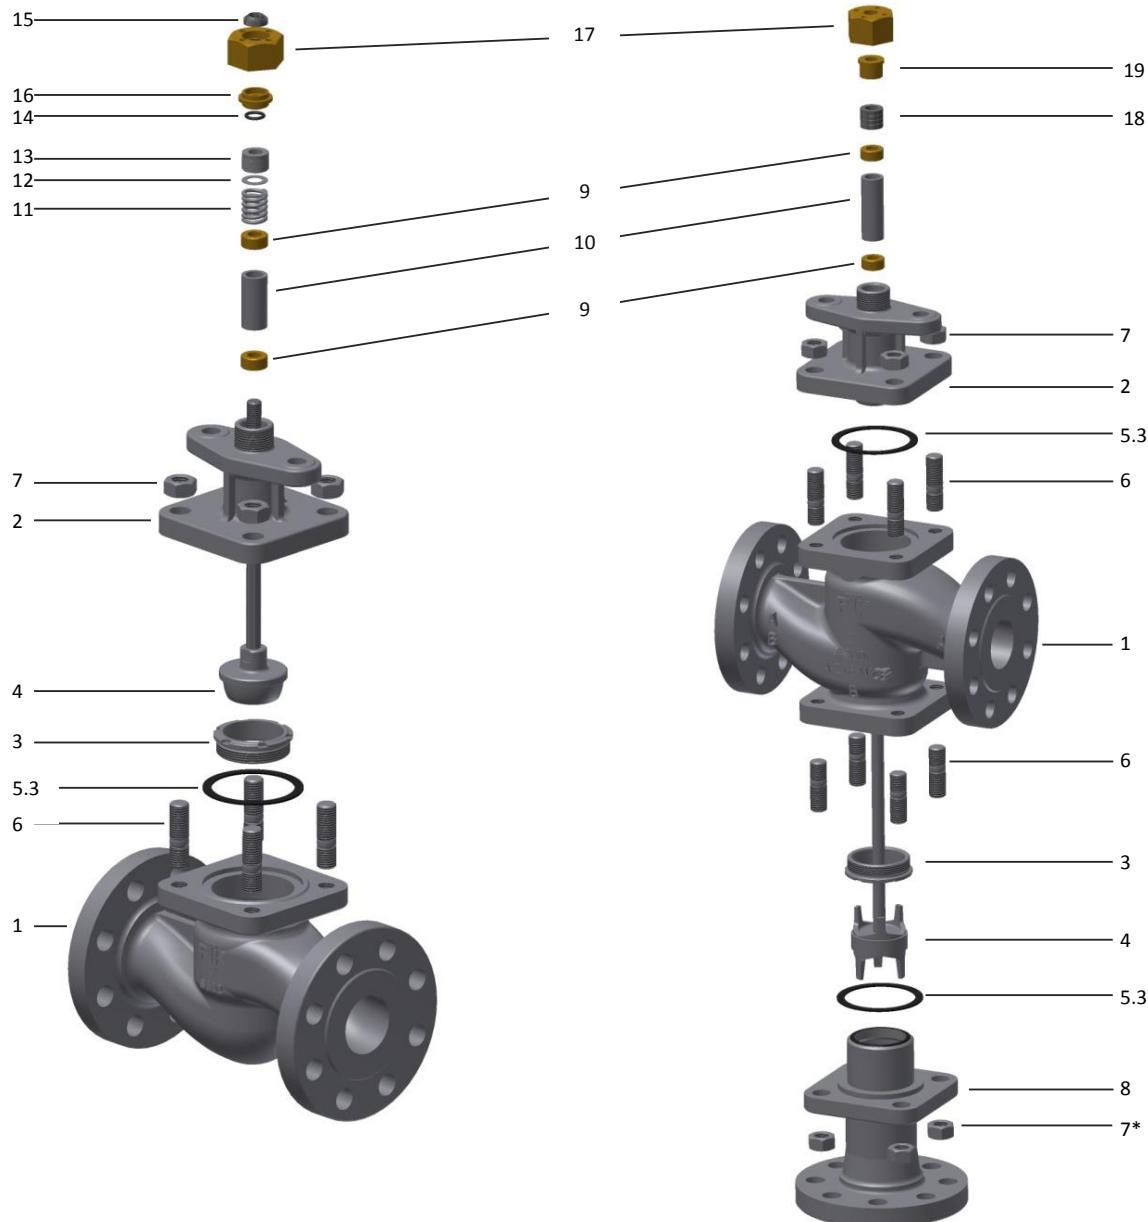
Typical component overview of 2-way (PTFE/Graphite packing) and 3-way (Graphite packing) valve
